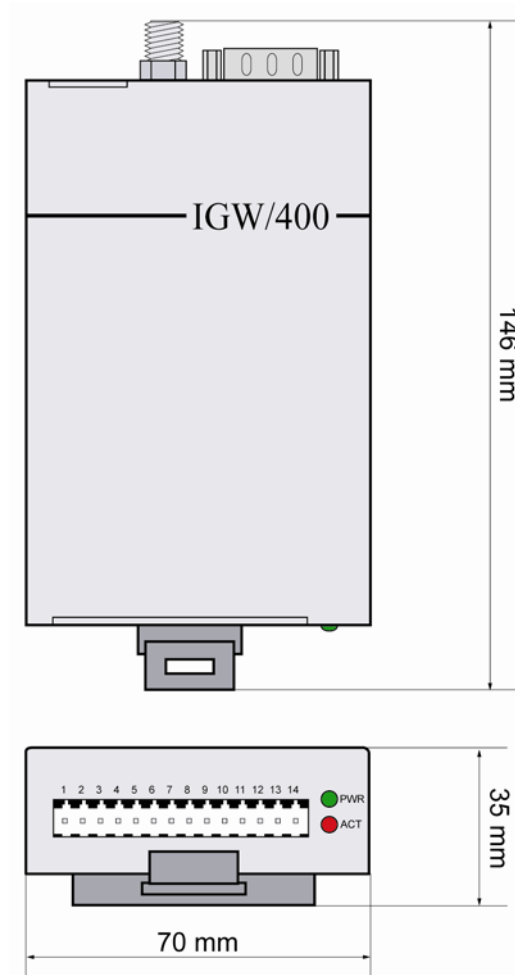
Mechanical dimensions of IGW/400-CAN with DIN-rail mounting set
